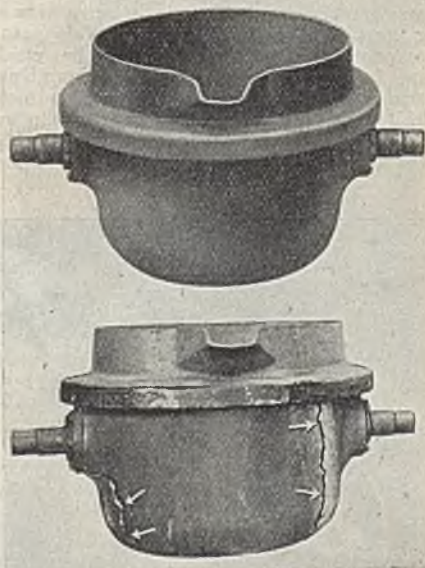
A large cast-iron pan. Below, the two vertical cracks continued into a horizontal crack extending right across the bottom. Above, the same pan after repair; within a few days a first-class repair was made by scientific welding, and guaranteed.
